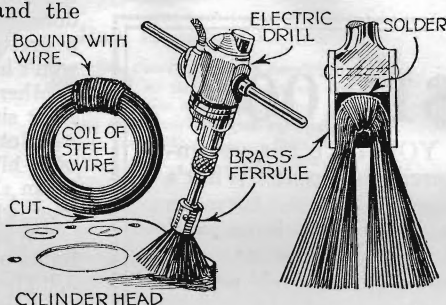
This electrically driven scratch brush of simple construction makes carbon removal an easy task
